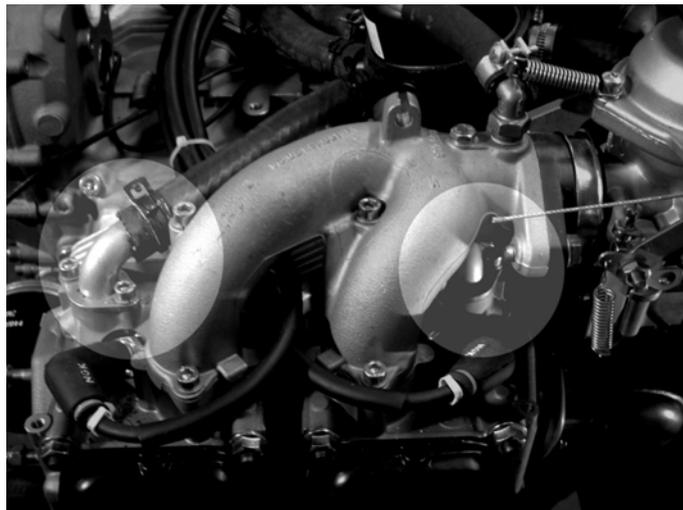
; water pipe attachment elbows to left of, and under, inlet manifold.
